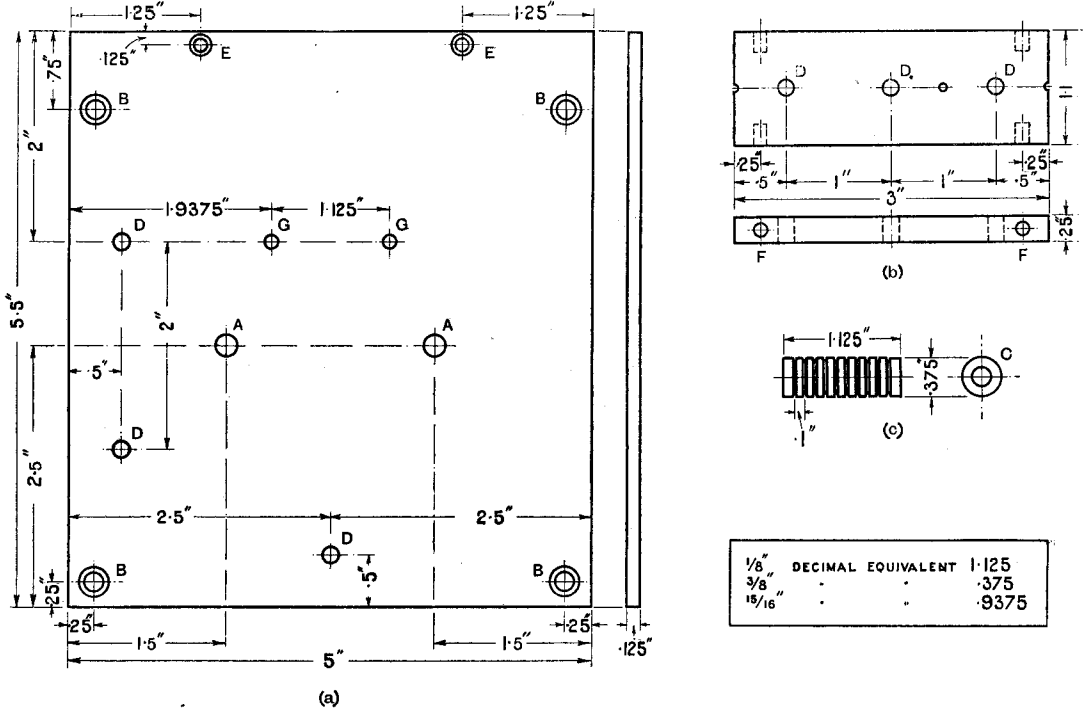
Component parts of the inductance unit. Decimal dimensions are shown for uniformity and fractional equivalents are given. Sizes of holes: A, Drill 7/32" dia.; B, Drill 3/16" dia. and countersunk on top side for No. 3 B.A. screws; C, Tapped No. 3 B.A.; D, Drill 5/32" dia.; E, Drill 1/8" dia. and countersunk on top side for No. 6 B.A. screws; F, Tapped No. 6 B.A. x 3/16" deep; G, Tapped No. 4 B.A.
